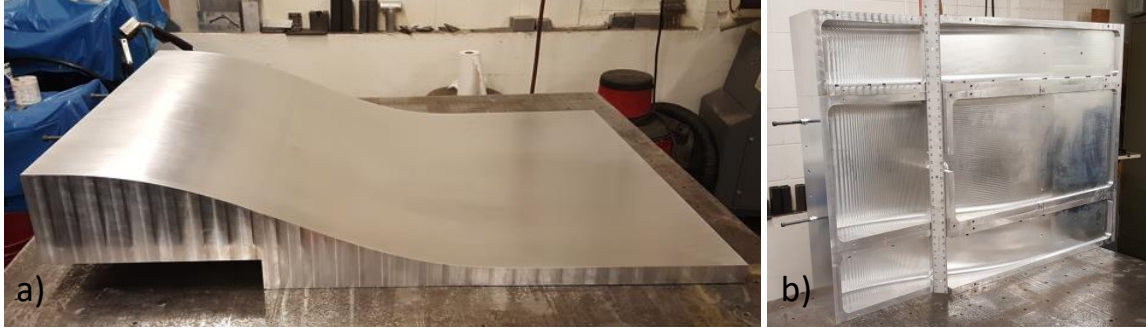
Photographs of the assembled ramp model just after polishing. Top view of the ramp a) and bottom view showing the three separate sections bolted together b).
